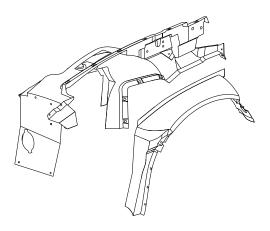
Service Assembly Can Be Separated for Outer Wheelhouse Panel Replacement
